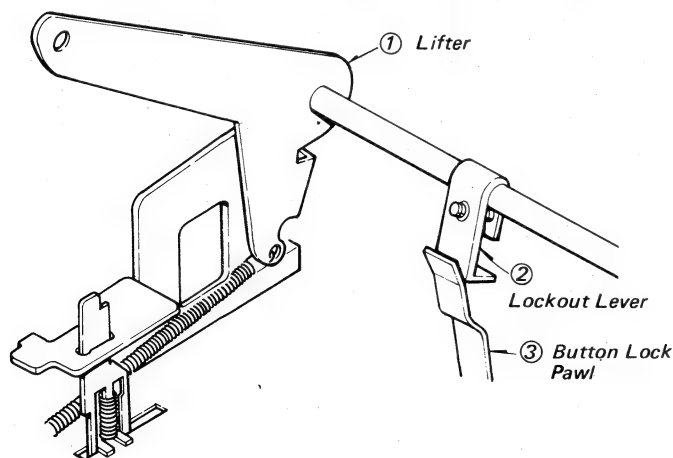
Lifter Installation With Lockout Lever and Button Lock Pawl in Place.
